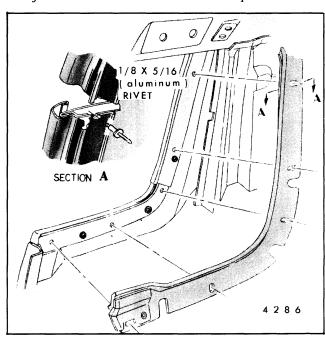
Quarter Window Outer Sealing Strip Rivet Installation ("E-57" Style Shown, "B-C-E" Styles Similar)
